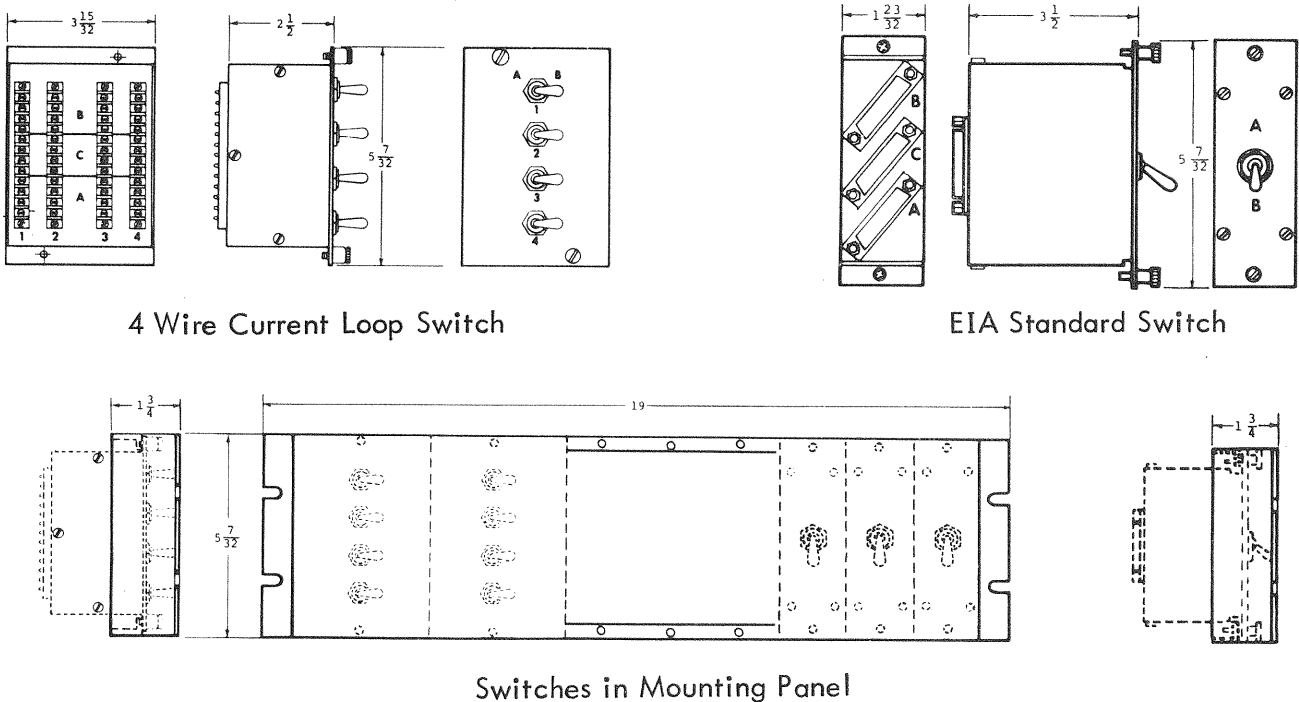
CS11 Switches, Dimensions, and Mounting Information
